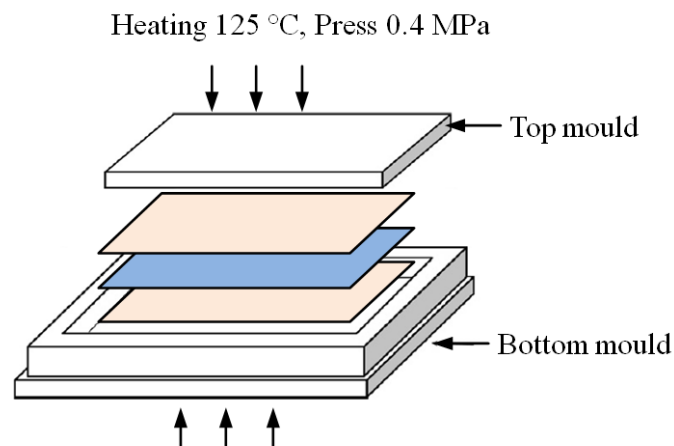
Schematic of the stacking arrangement of a 2/1 FML in a picture frame mould.
